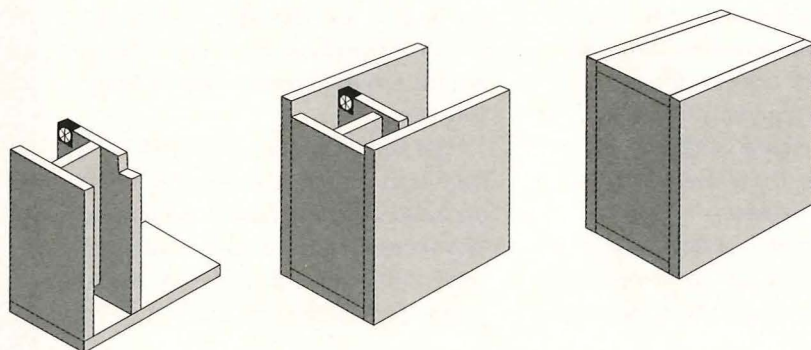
Assembly. This diagram shows the assembly of the bottom, rear, baffle, fan, side and top portions of the chiller.
